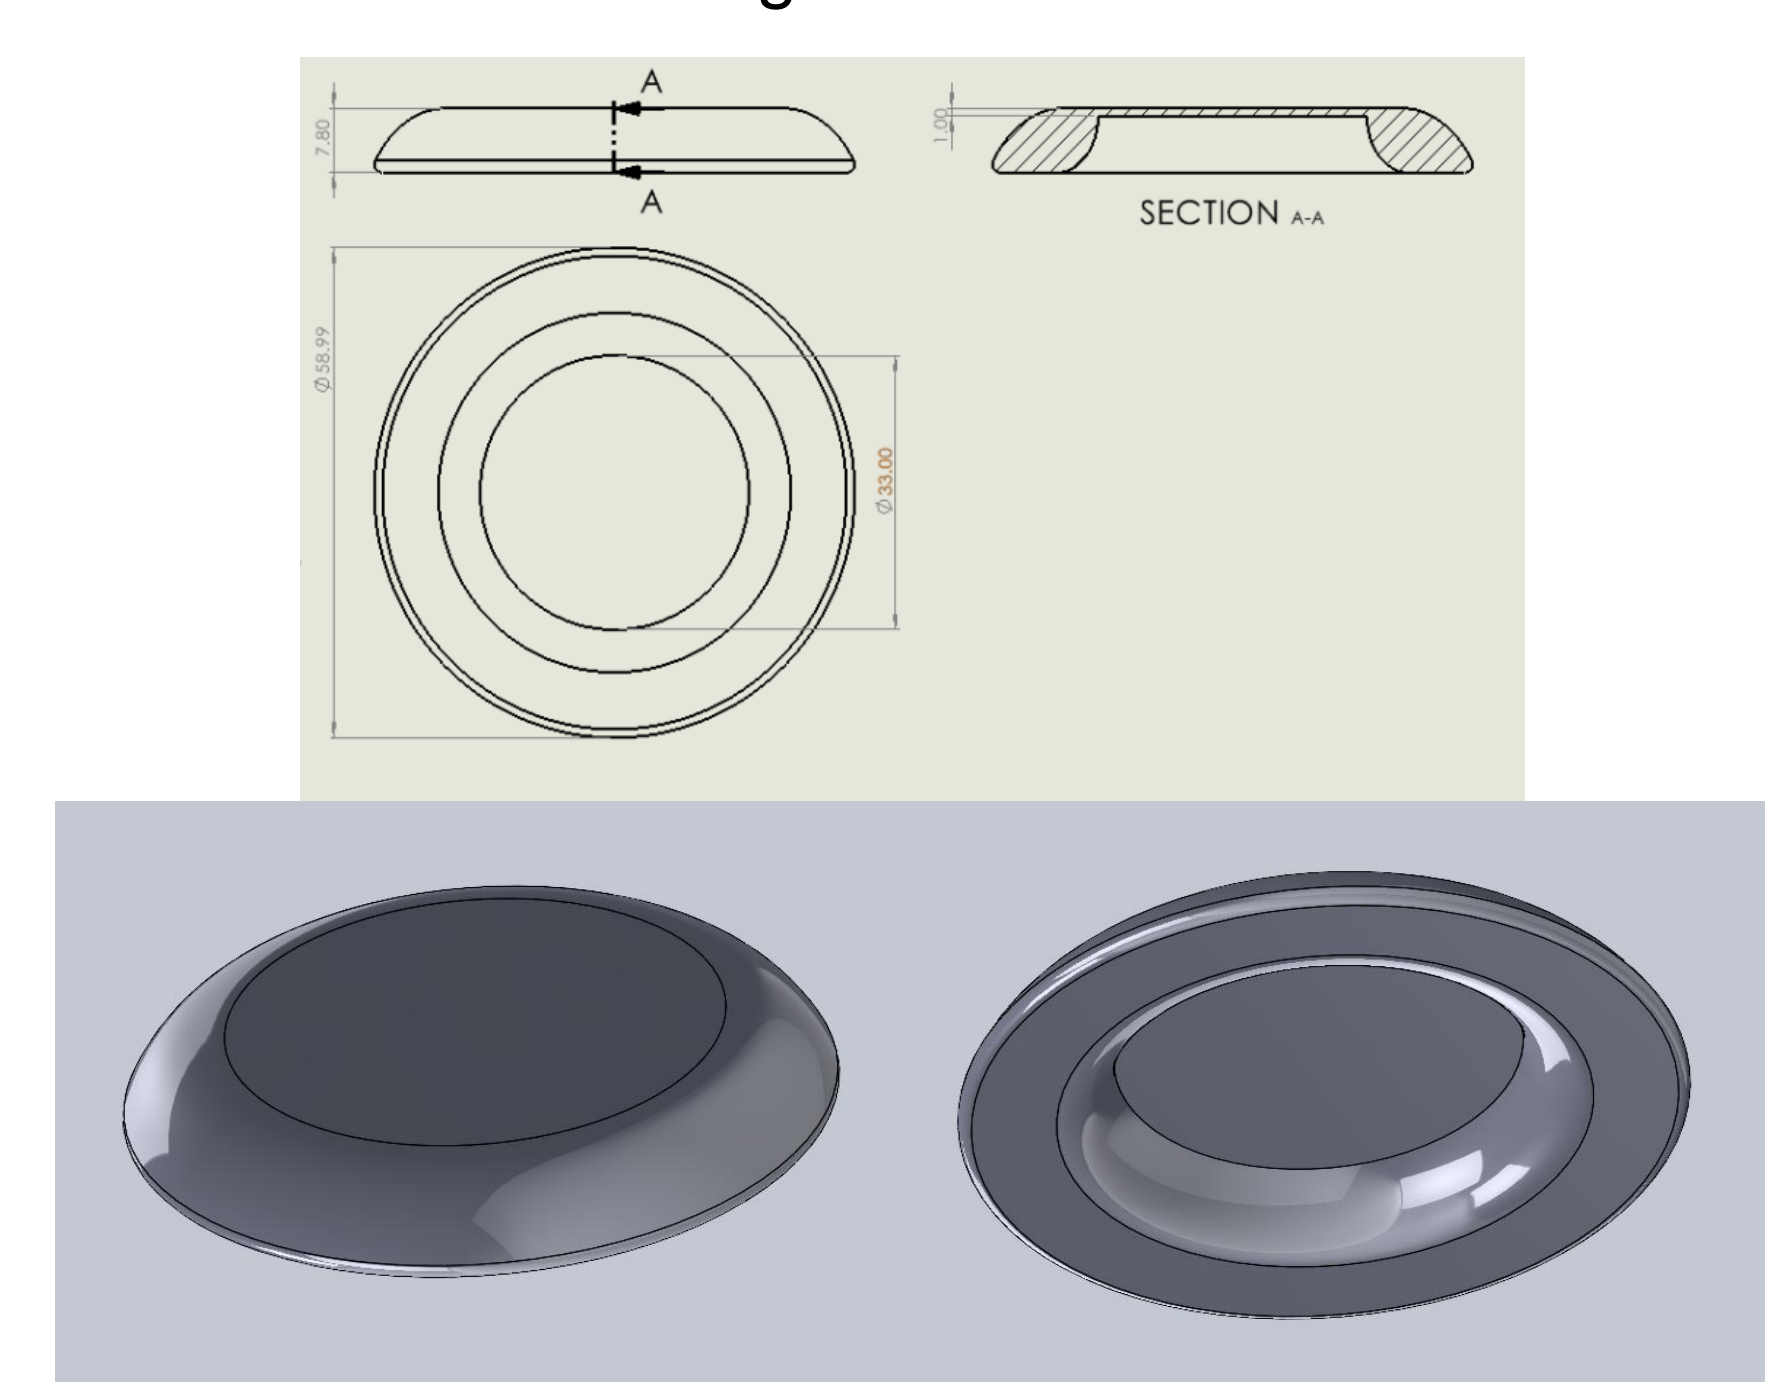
Dimensioned Drawing and Top/Bottom Views of 3<sup>rd</sup> Iteration
